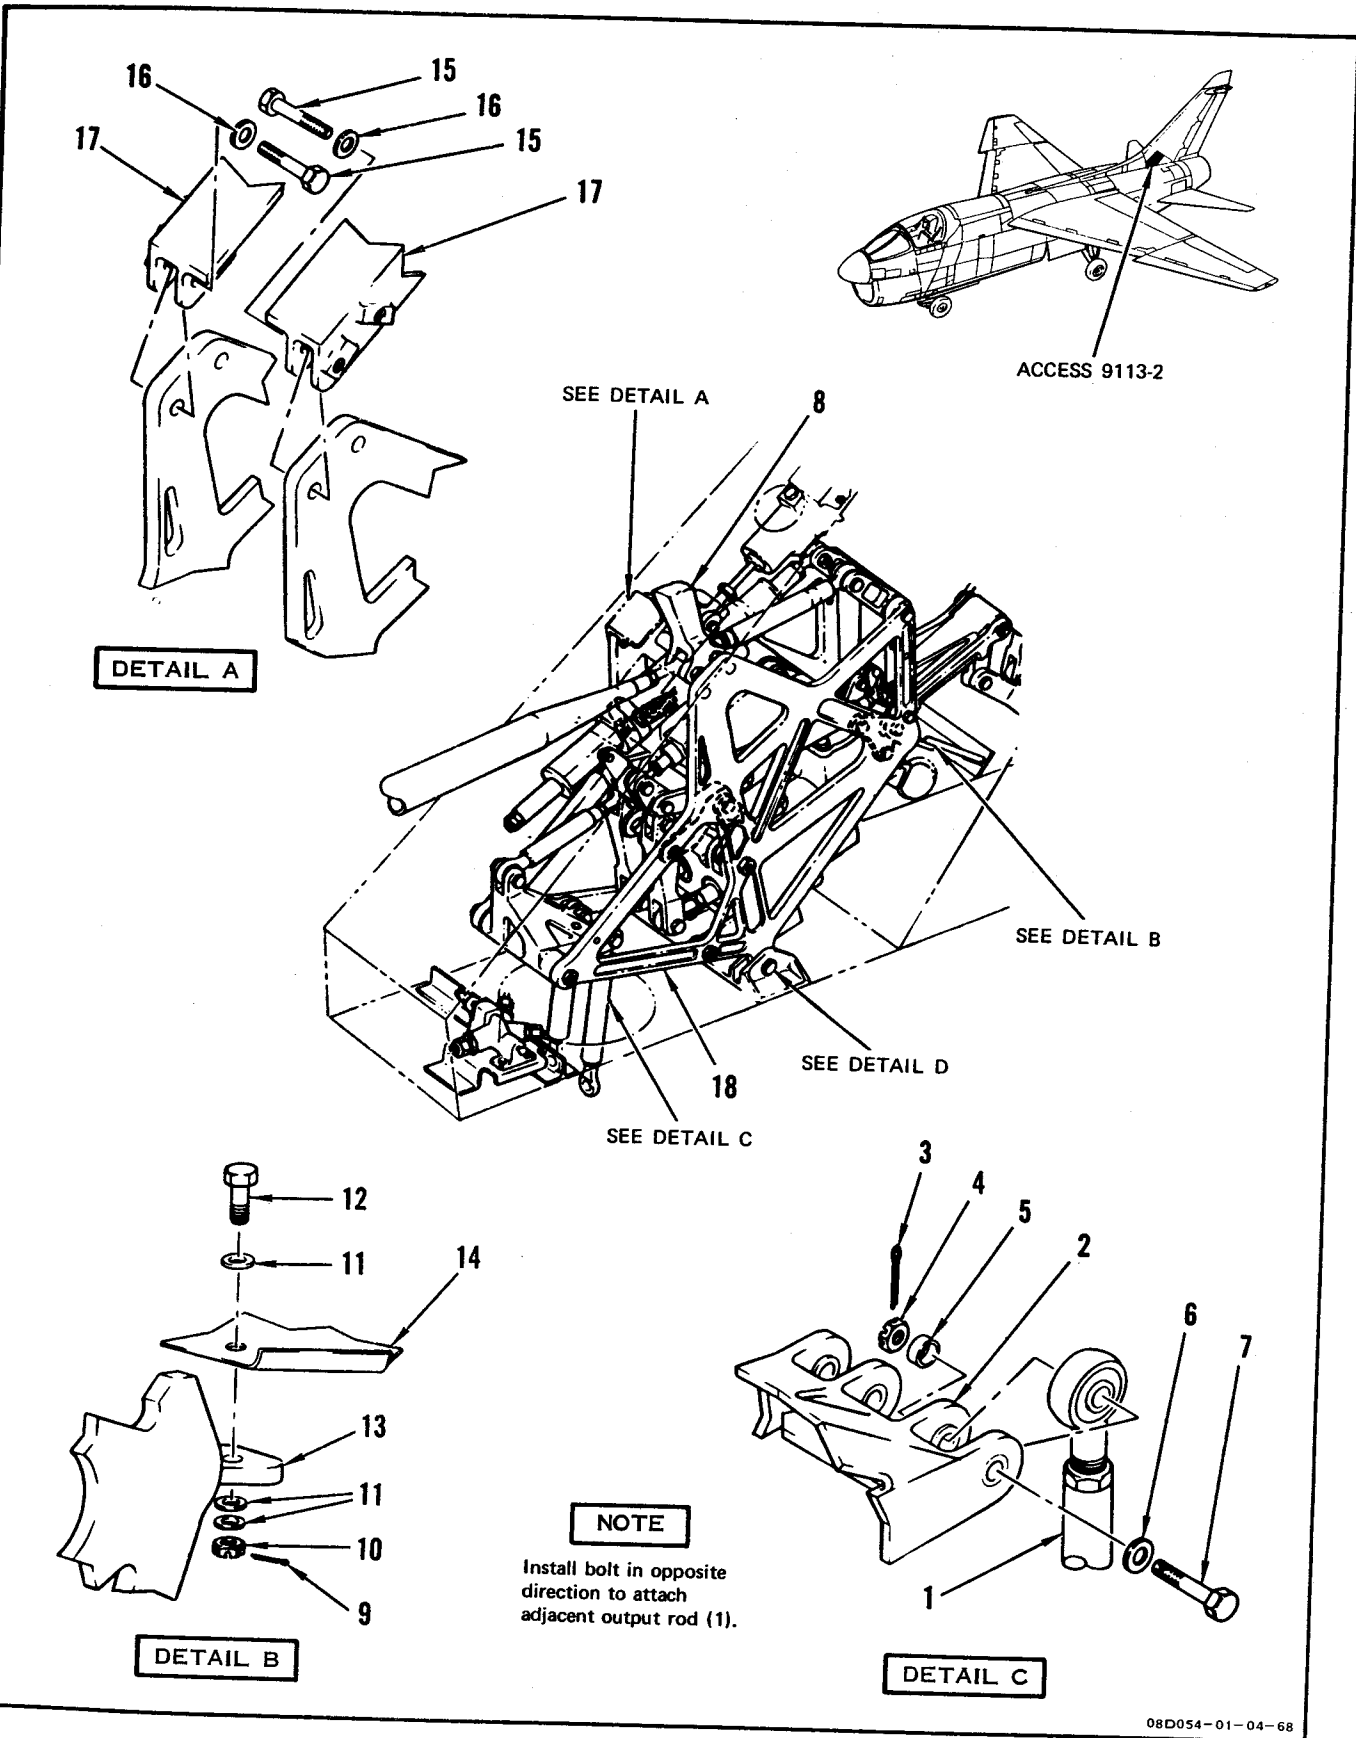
Feel and Trim Linkage Package Removal and Installation (Sheet 1)
